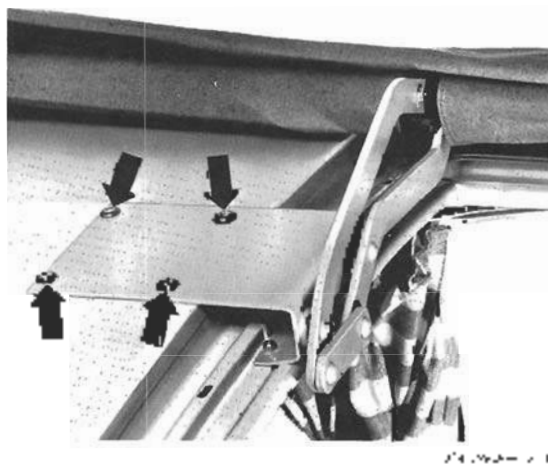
Phillips head screws that hold the folding cot front hinge to the vehicle roof.
